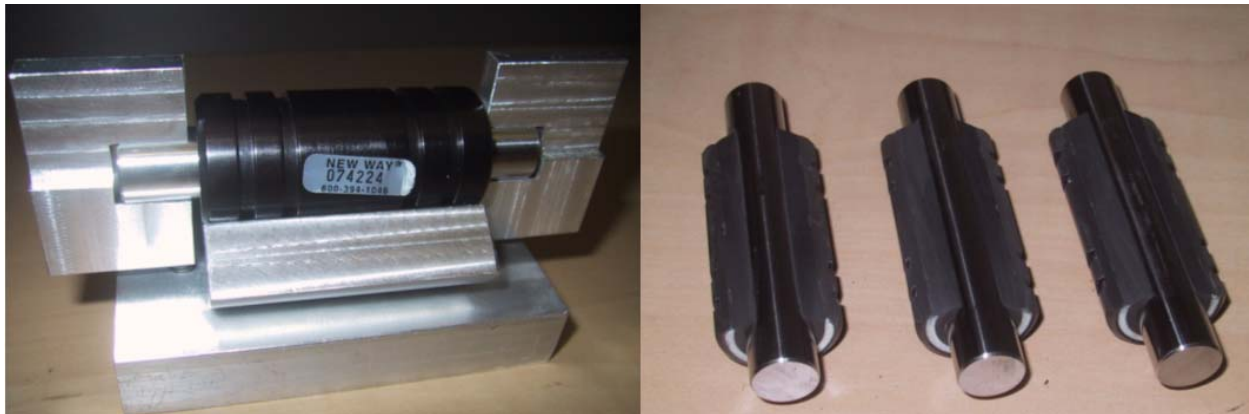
Fixture for Modifying Air Bearings (left) and Finished Partial Air Bearings with Shafts
